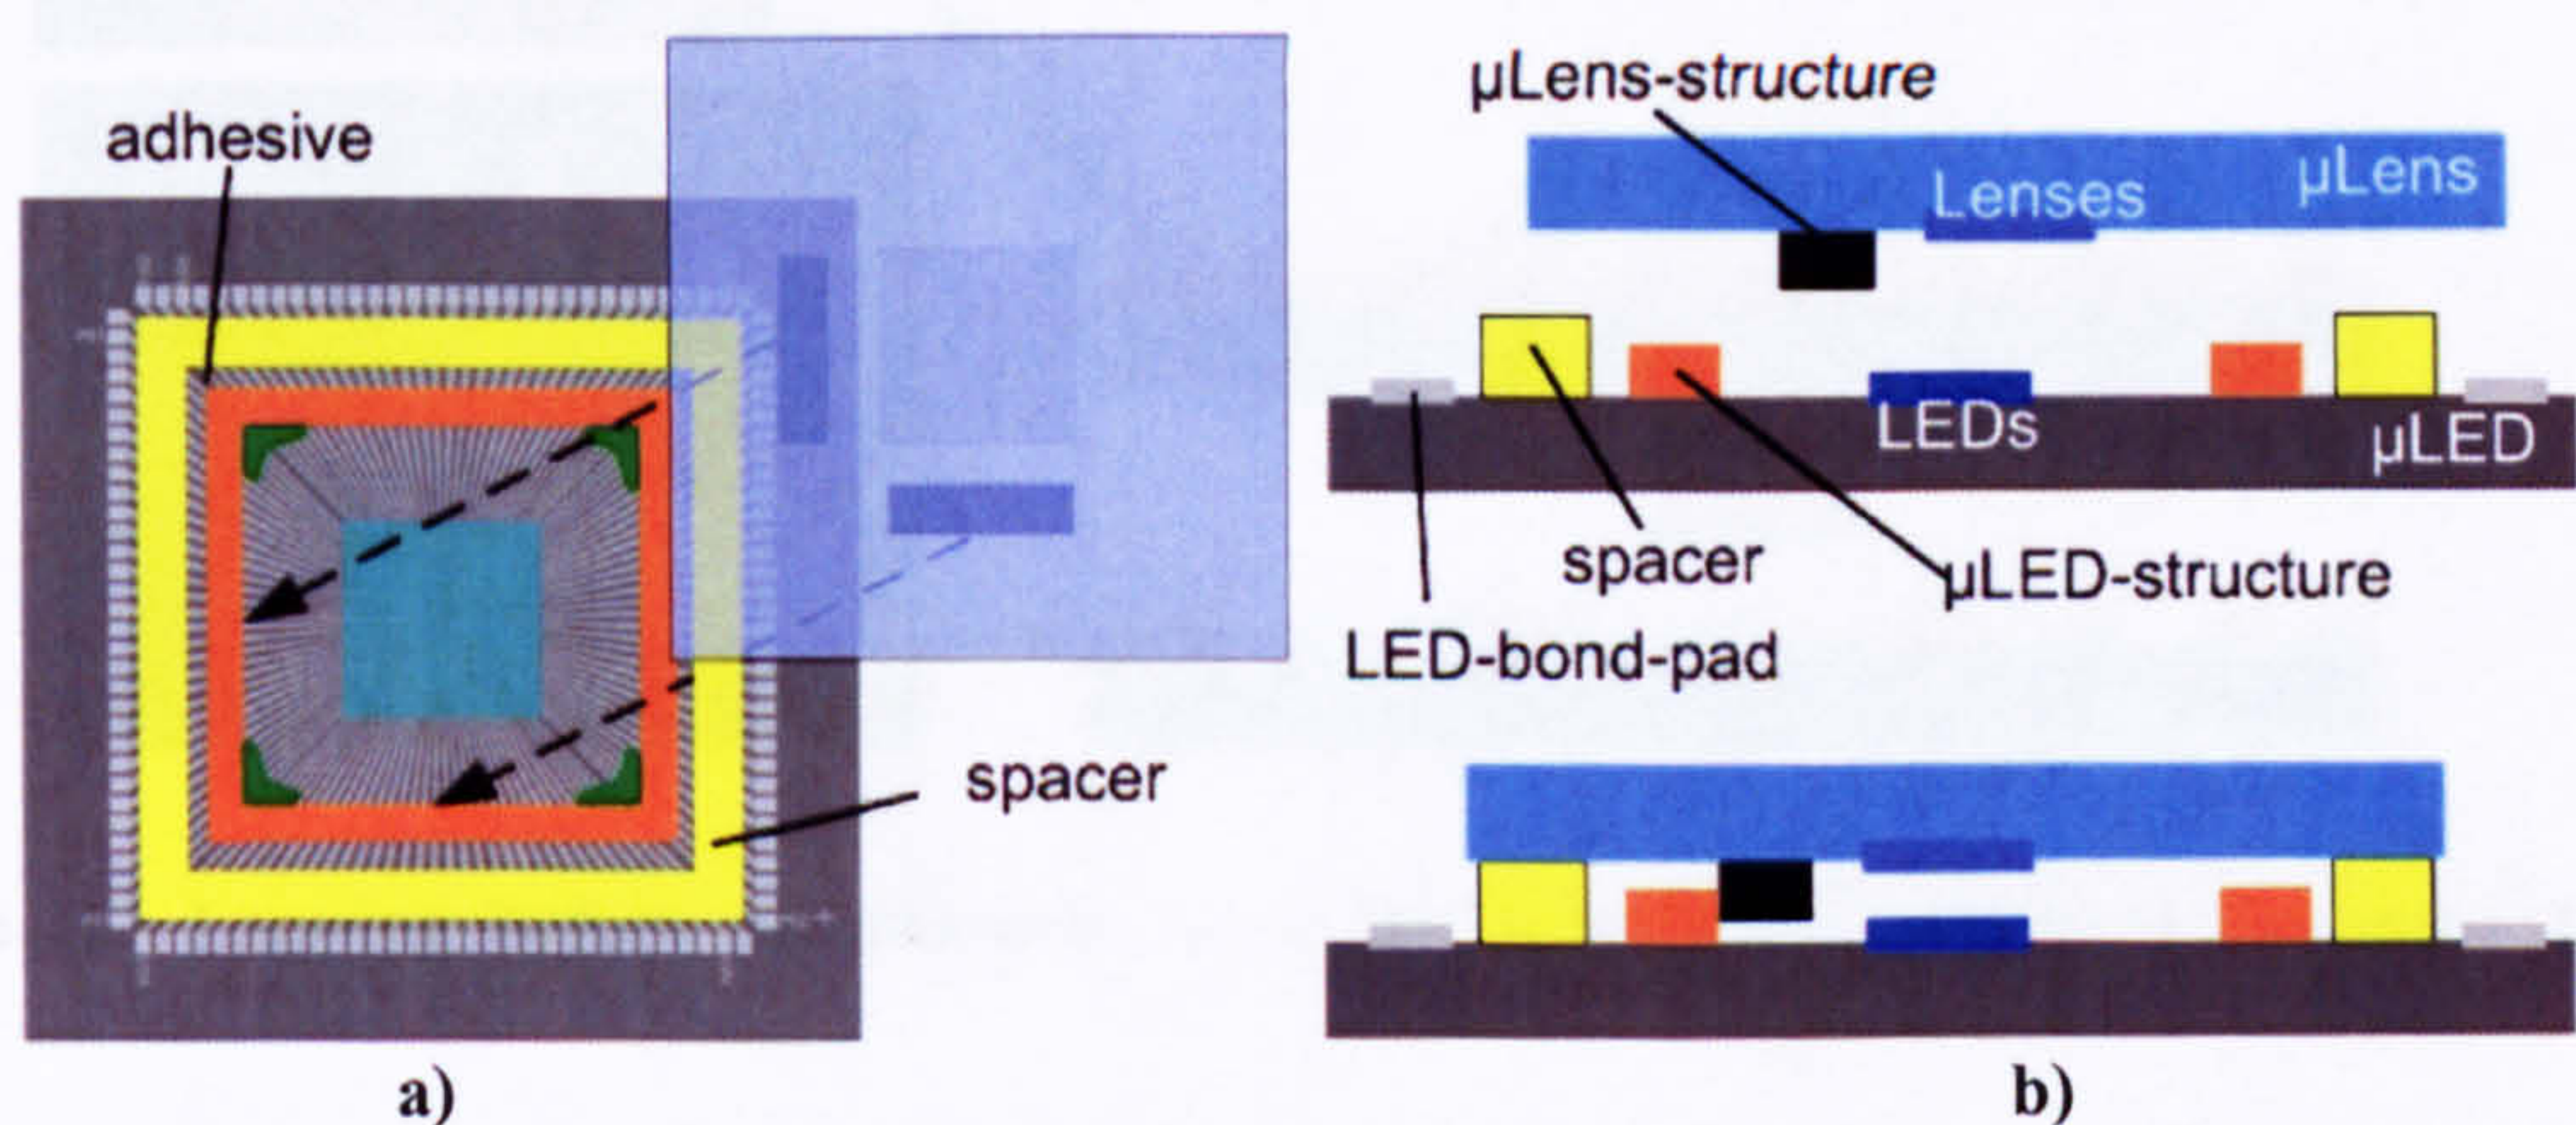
a) Top view of μ LED with μ LED-structure and spacer prior of being assembled. b) Top: side view of the situation shown on the left. Bottom: assembled device. Vertical alignment through spacer, lateral alignment through μ Lens- and μ LED-structure.
